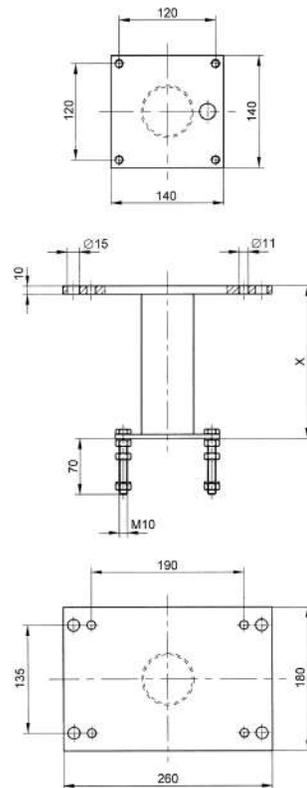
Measuring sheet spacer block CB 1100104 and CB 1100204
